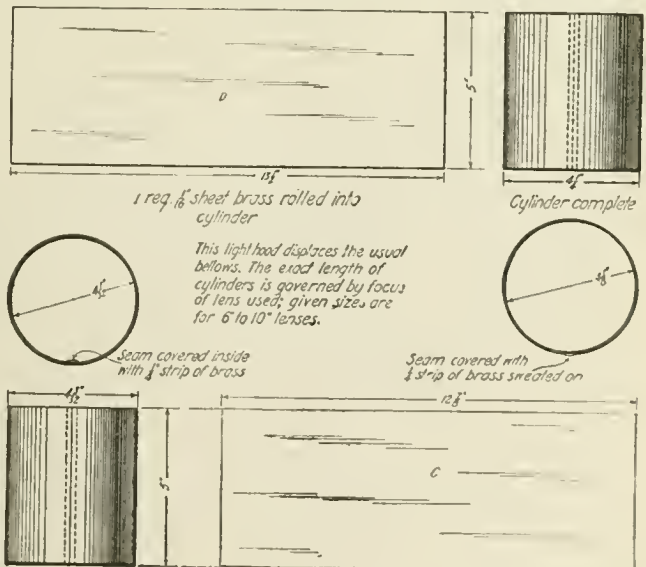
The telescoping cylinders made of thin sheet brass accurately cut and shaped with a tinner's roll
